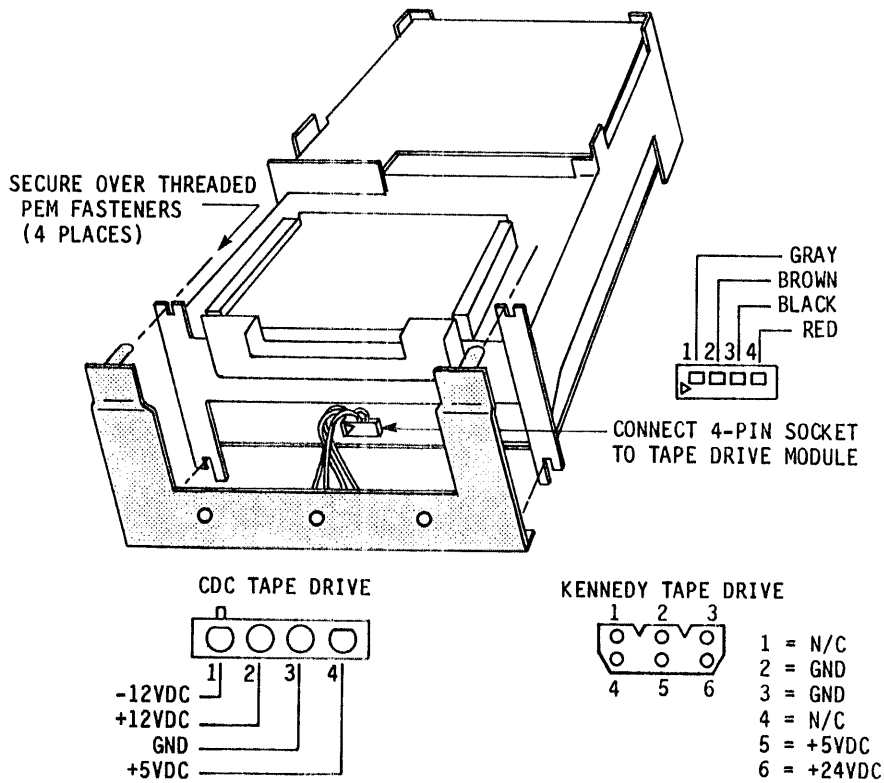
8" TAPE DRIVE INSTALLATION
